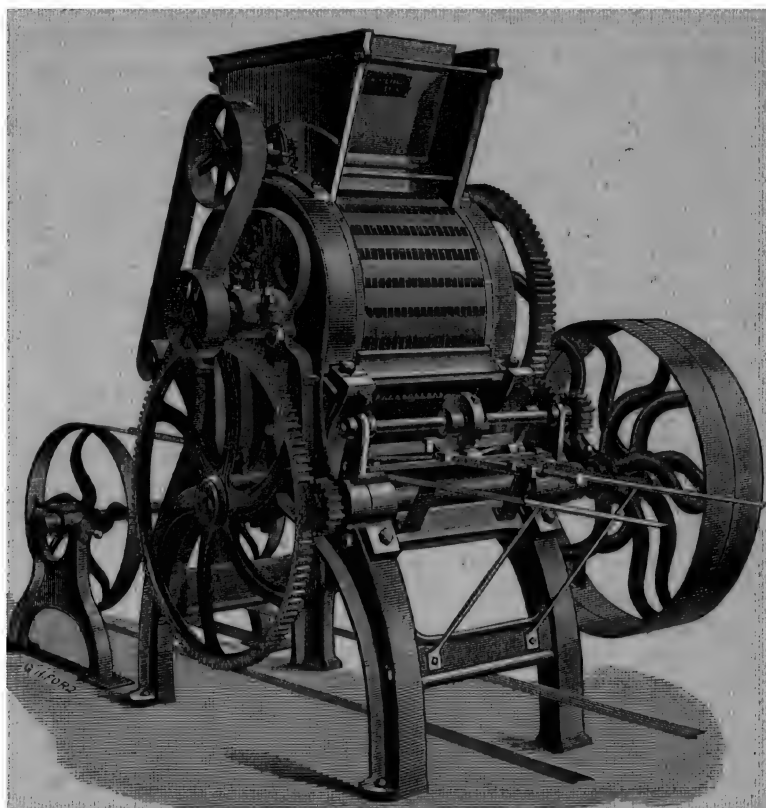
HERSEY CUBE-SUGAR MACHINE
